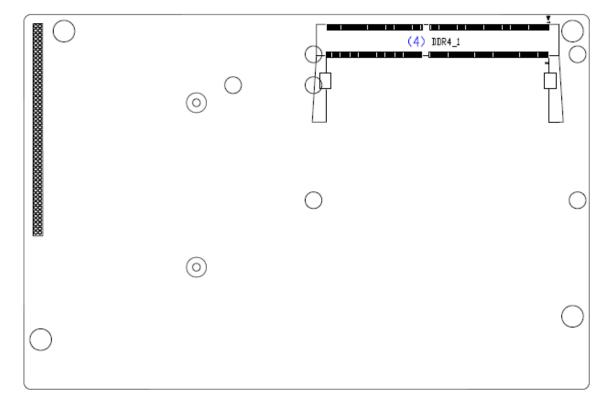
Jumpers and Connectors Location- Board Bottom
